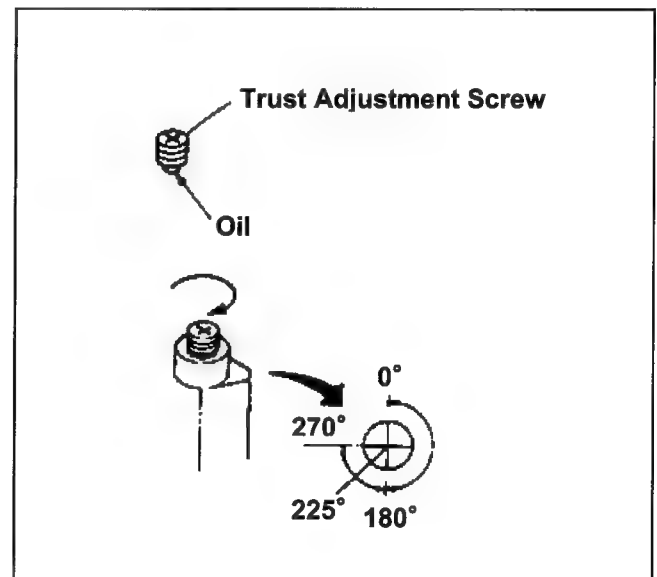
Adjustment of Thrust Adjustment Screw
